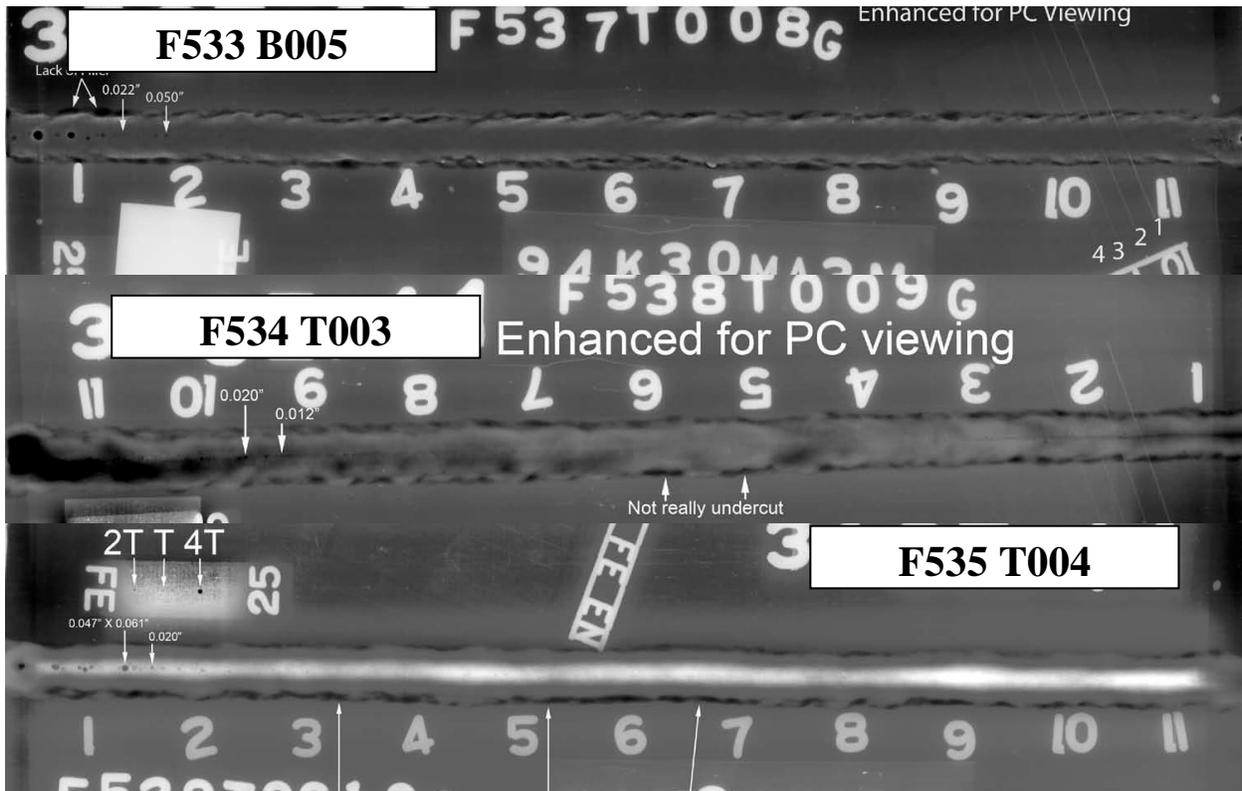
Radiography of the Test ERNiCuRu Welds
